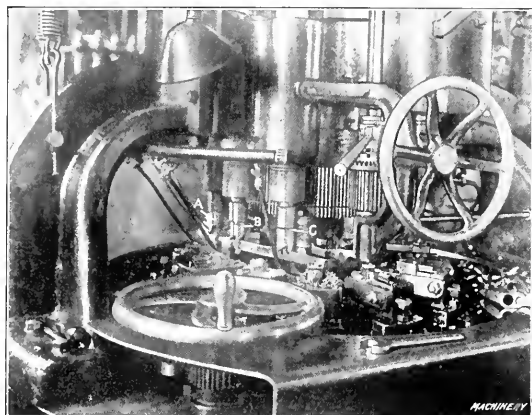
Special Multiple-spindle Machine for drilling, reaming and milling Rifle Receivers
